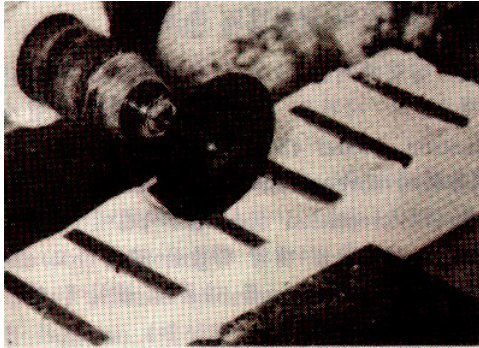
Assembly for sectioning castings; specimen is held at right angles to separating disk.
